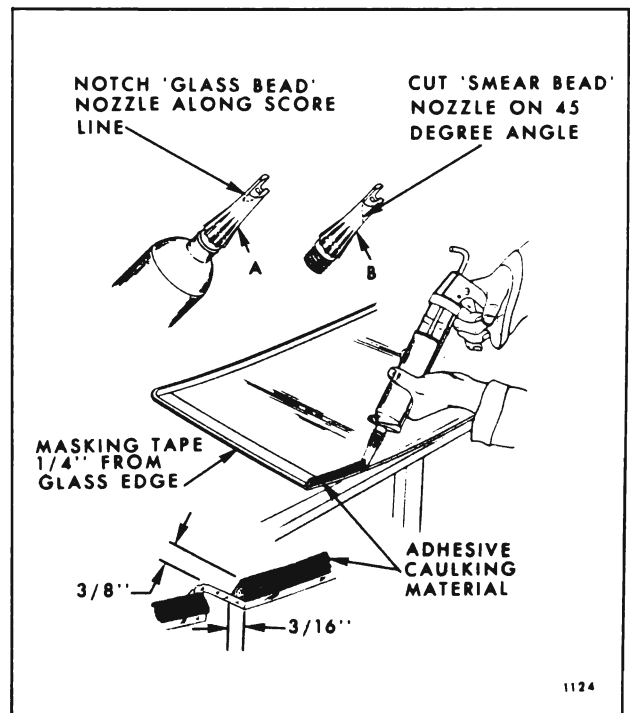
Adhesive Caulking Material Application - Extended Method
